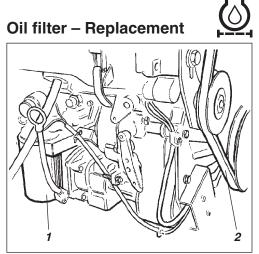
Diesel engine 1. Oil filter 2. V belt
